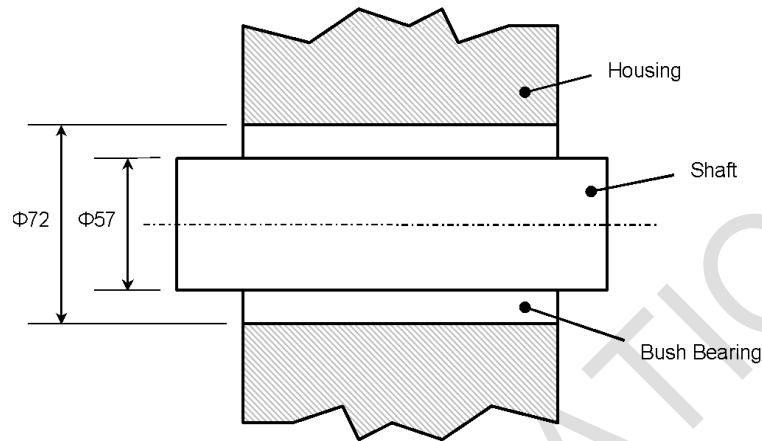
Cross-sectional view of a shaft, bush bearing and housing assembly
